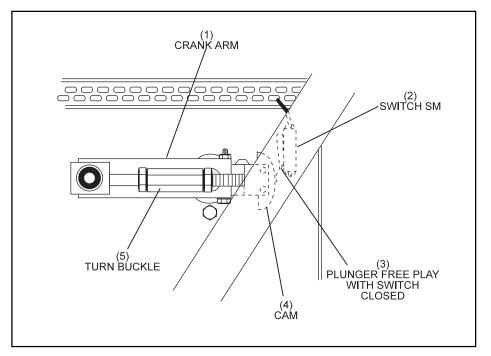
Sweep Motor Switch "SM" Adjustment.
